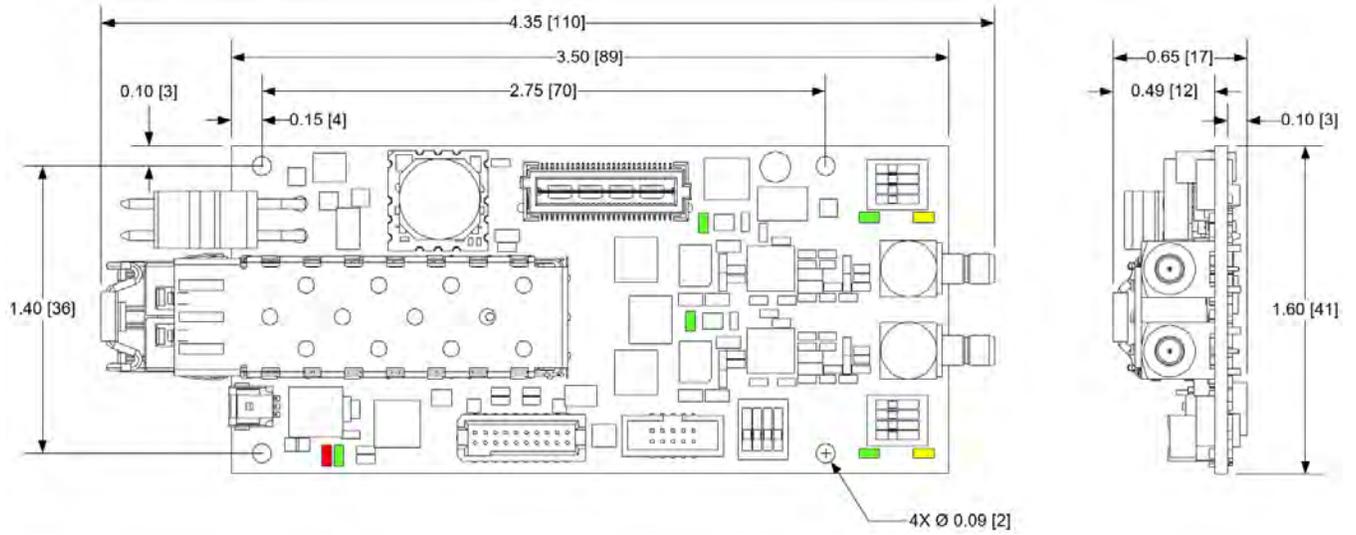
914-HDV2 Dimensions (inches [mm])
